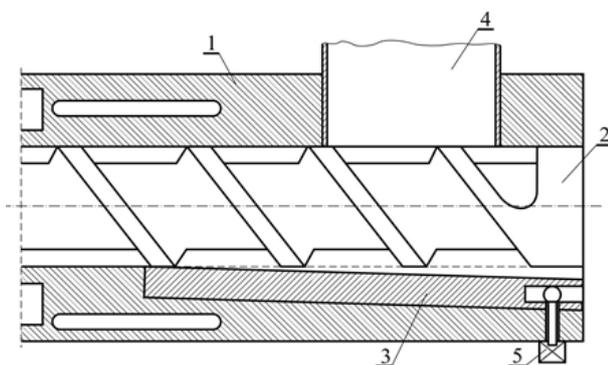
Longitudinal section diagram of the adjustable grooved feed section of an extruder: 1 - barrel, 2 - screw, 3 - slat (key), 4 - feed opening, 5 - actuator [4]
